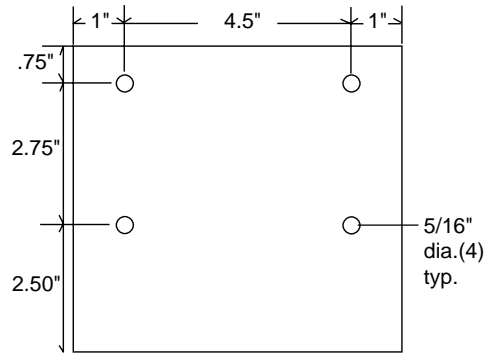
Mounting Dimensions - Flowmeter/Operator's Panel - 1 Torch
